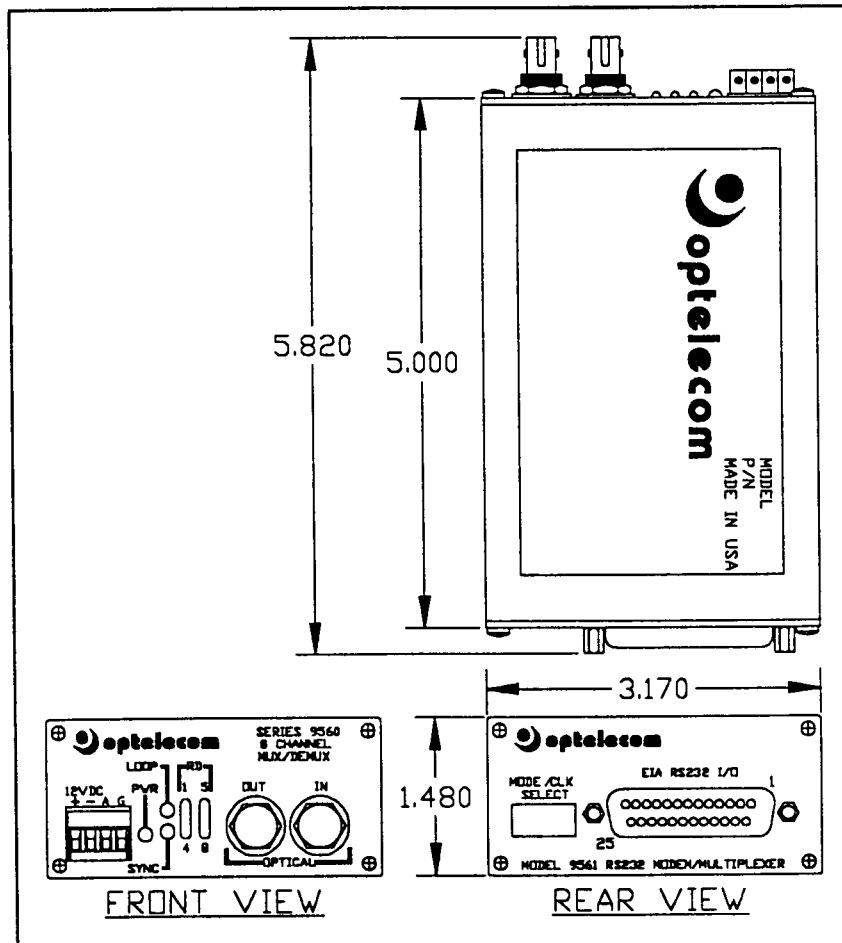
ENGINEERING VIEWS AND DIMENSIONS
